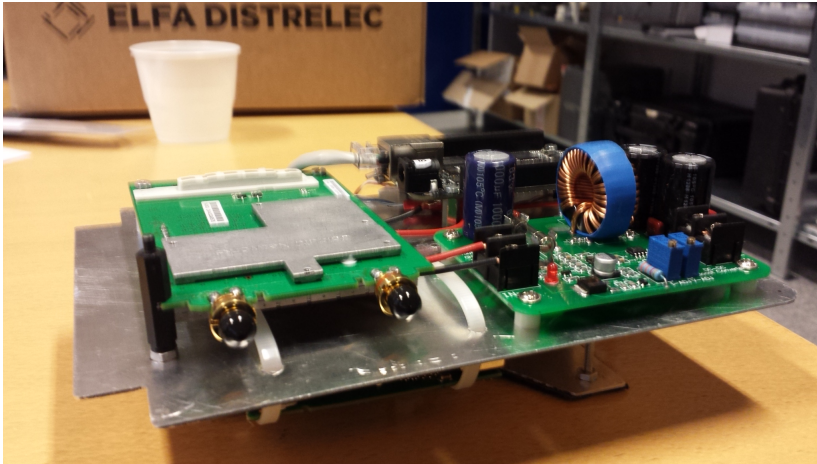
Top view of payload assembly, showing 48V step-up, BeagleBone and Ubiquity radio.
